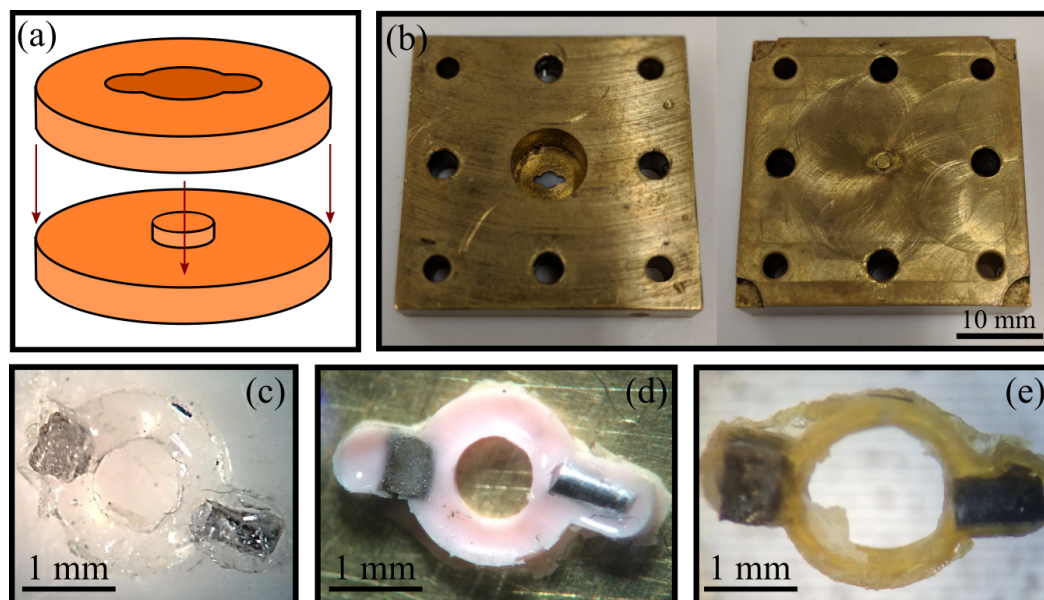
(a) Schematic diagram showing the improved two brass disks of the mould. (b) Photograph of the final improved mould - with holes for screws and dowels. The photographs show the swimmers produced from this mould for different materials: (a) silicone-based gel, (b) silicone rubber, and (c) latex.
